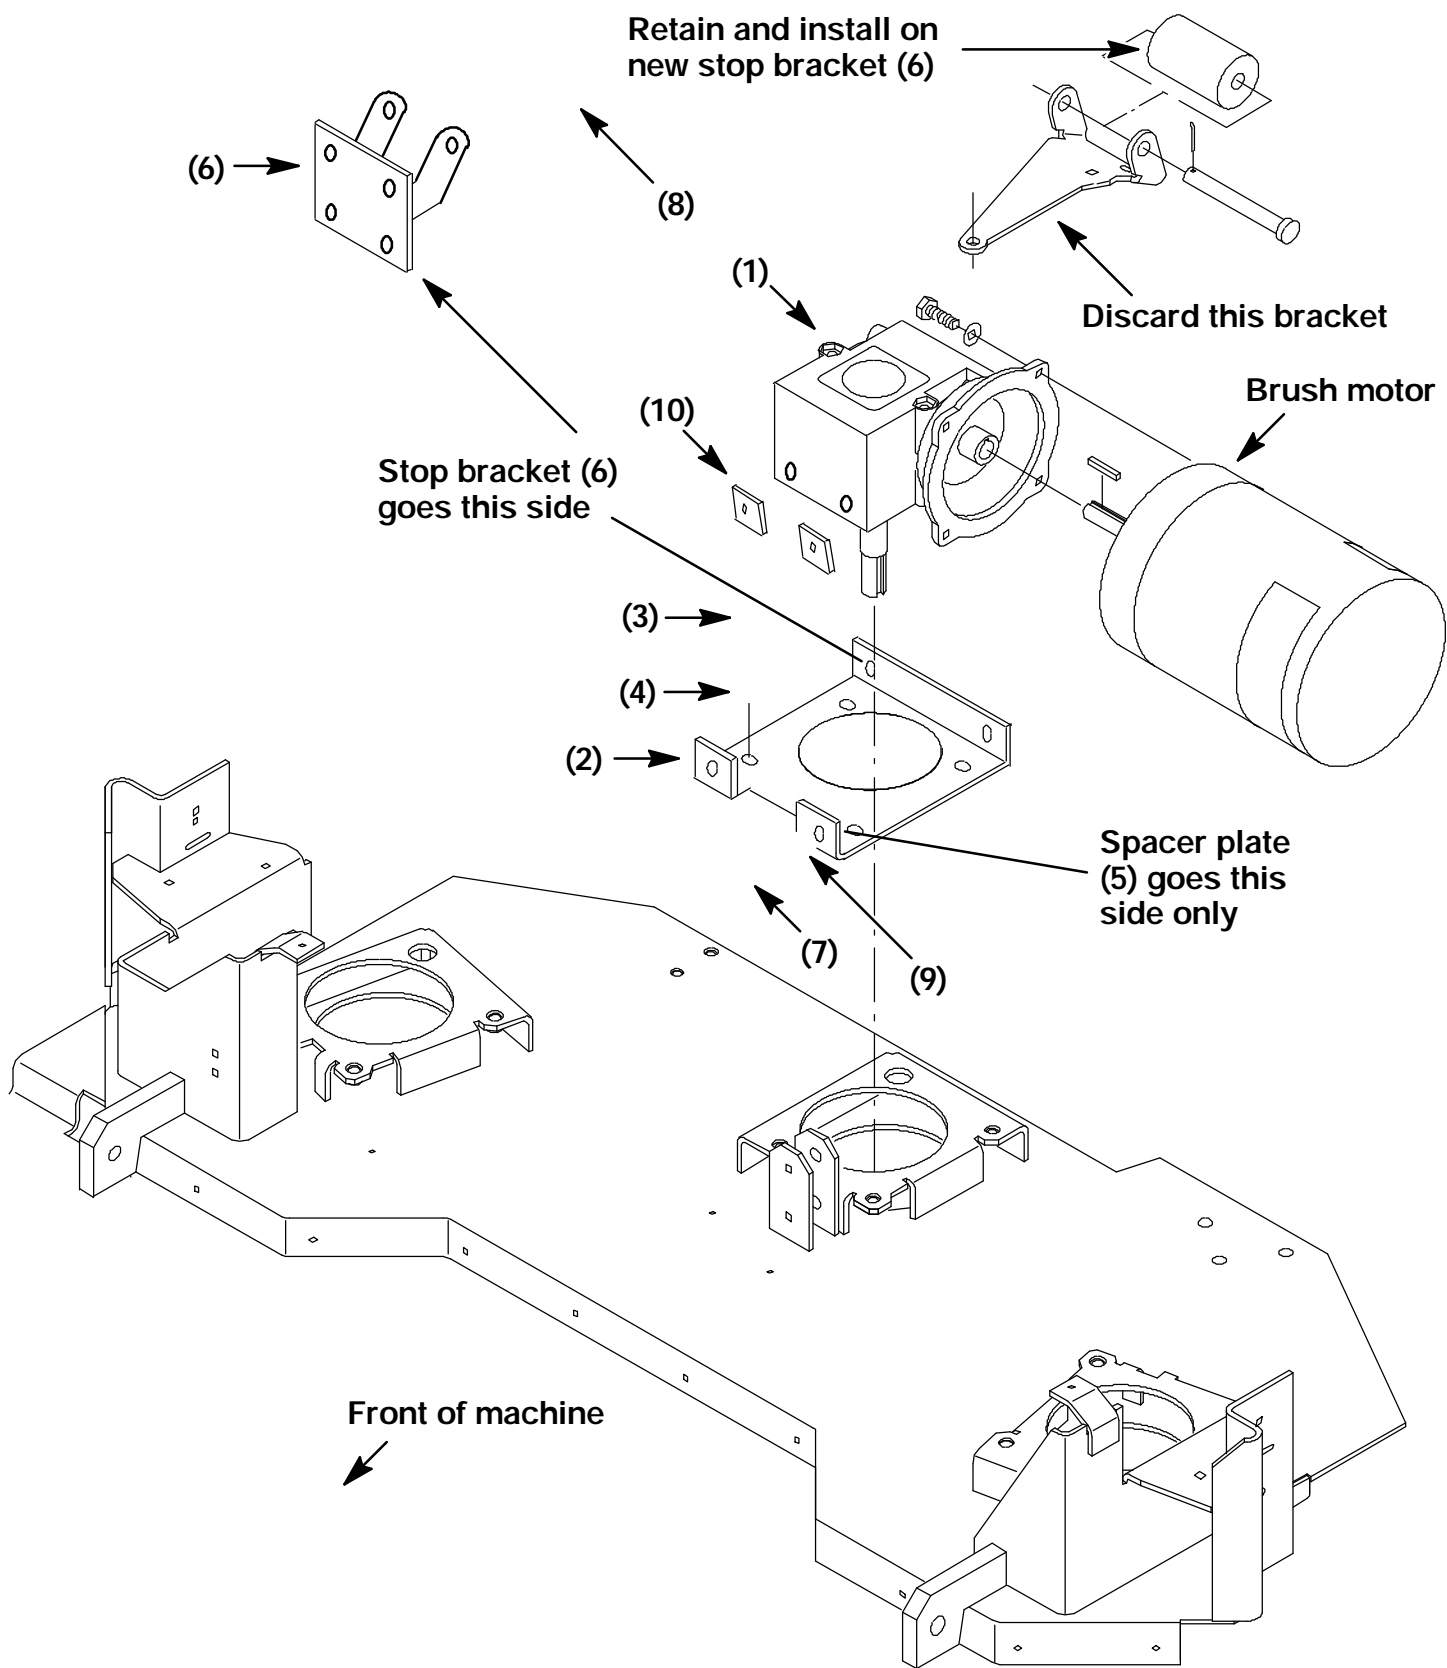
MAX PRO 1200 Scrub Head (center gear box)
